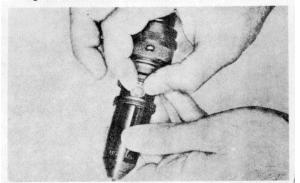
H-23. Installing the Fuel Inlet Screen and Retainer
